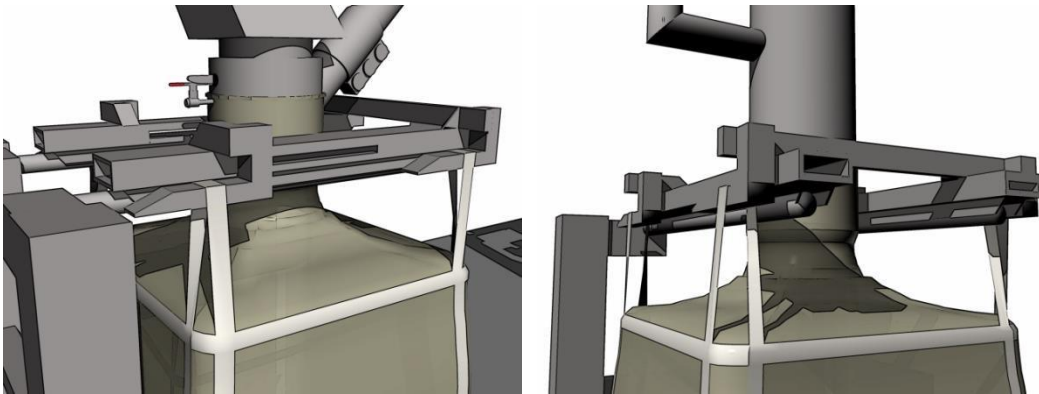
Bag filling stations with hooks mounted on frame that can be removed and lowered with a forklift.
